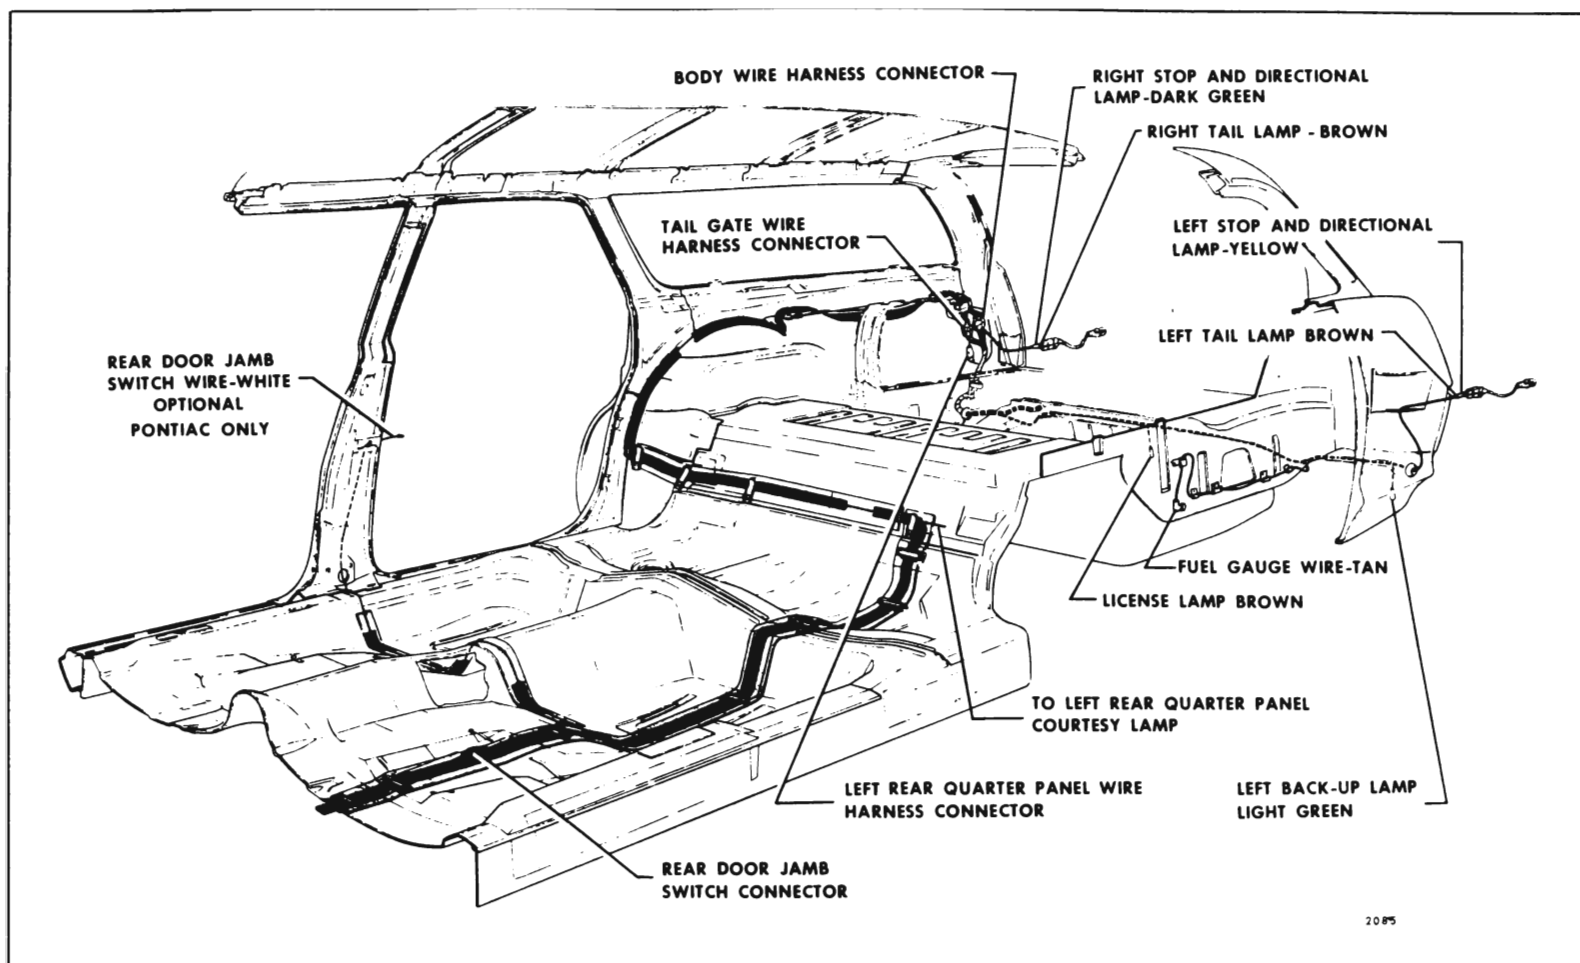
Right Side and Rear End Wiring - Chevrolet, Pontiac "B" Bodies
